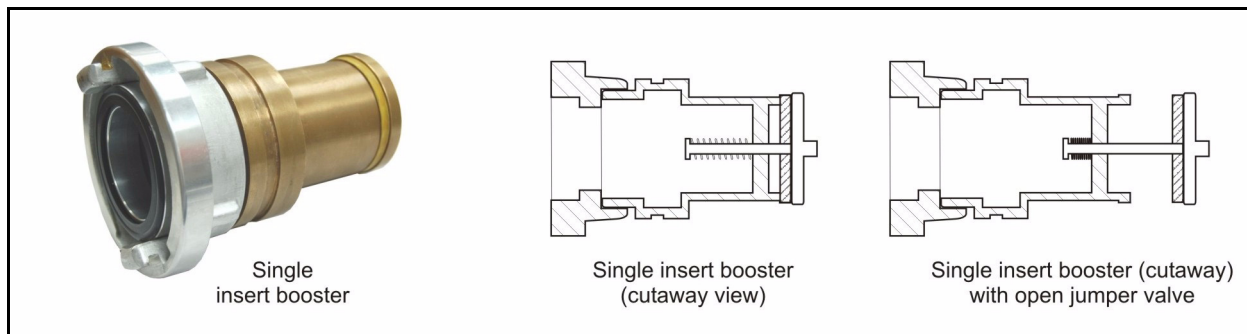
Side view and cutaway of single insert booster including plunger valve operation
